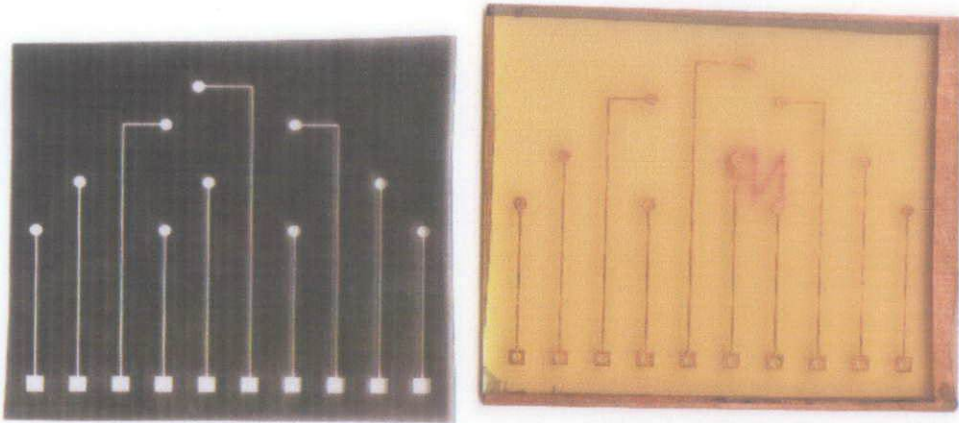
UV Film for PCB and Fabricated PCB-based Multielectrode Array Sensors
